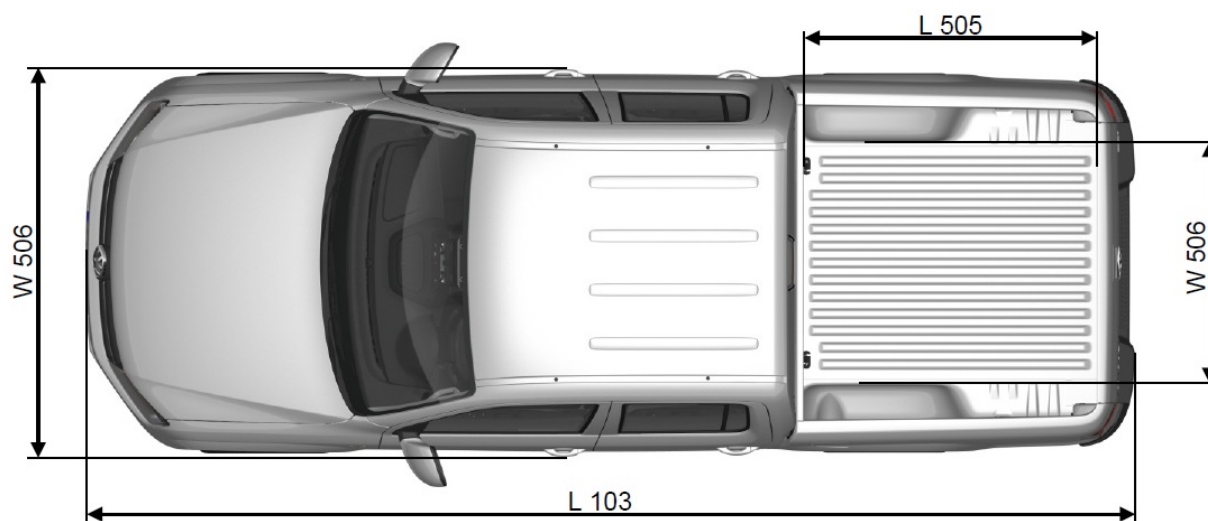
Plan view of AMAROK-DC (Double Cab)
